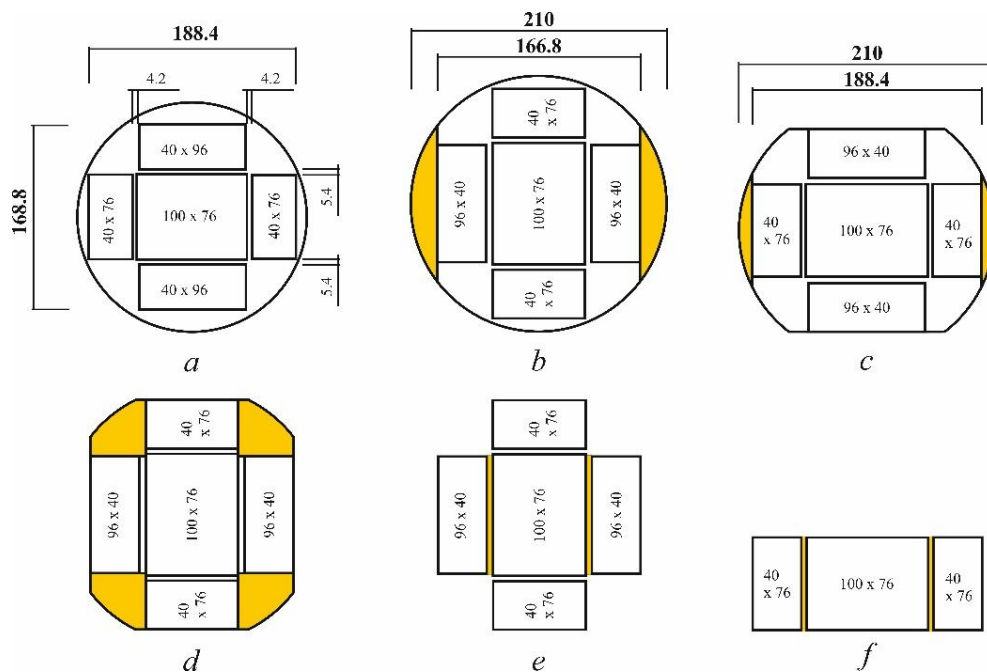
Cutting sequence with milling-prism machines (Campbell 2013)
